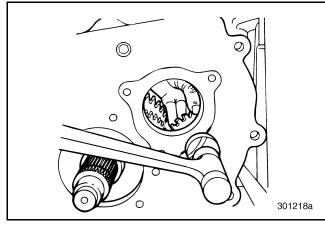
Installing No. 2 Reverse Idler Shaft and Gear
